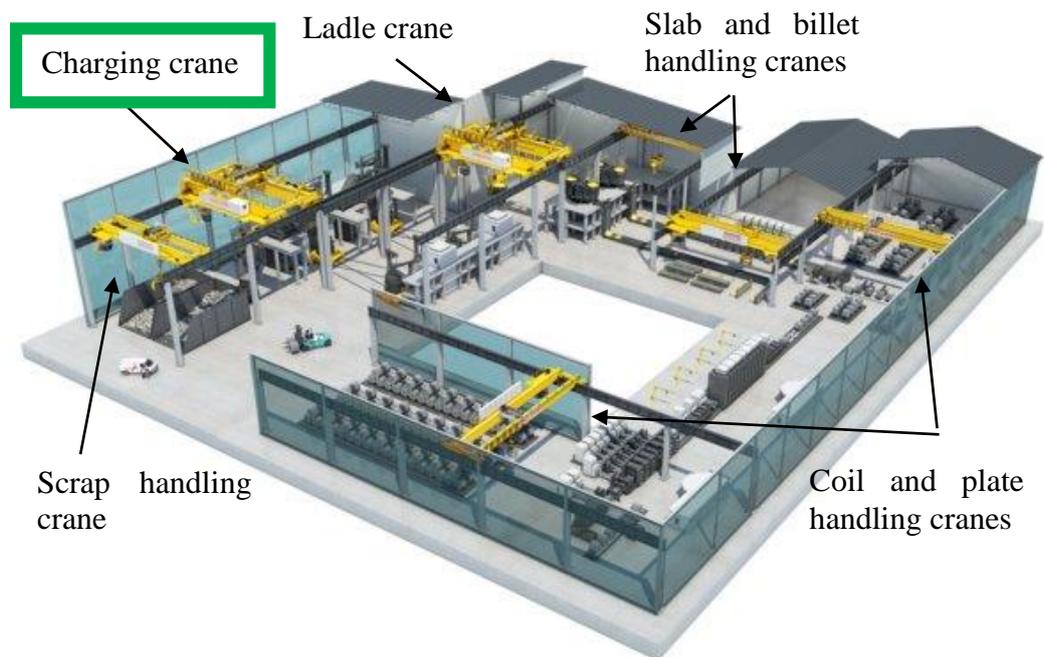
Steel factory layout (Konecranes Steel book 2013, 18)
